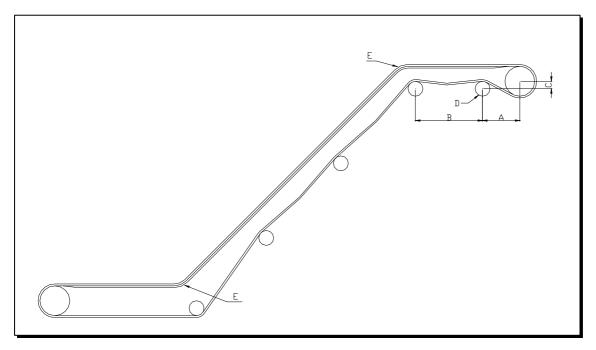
shows a similar elevator system. It is constructed in the same way.
